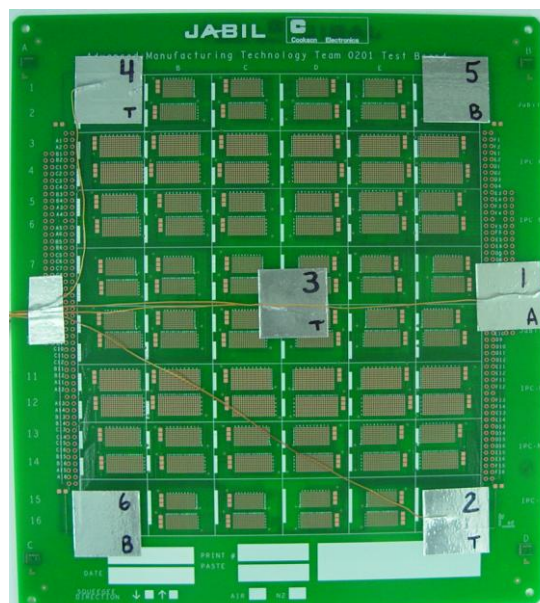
Thermocouple attachment. Locations 1 through 4 are on the top side; 5 and 6 are on the bottom side.
